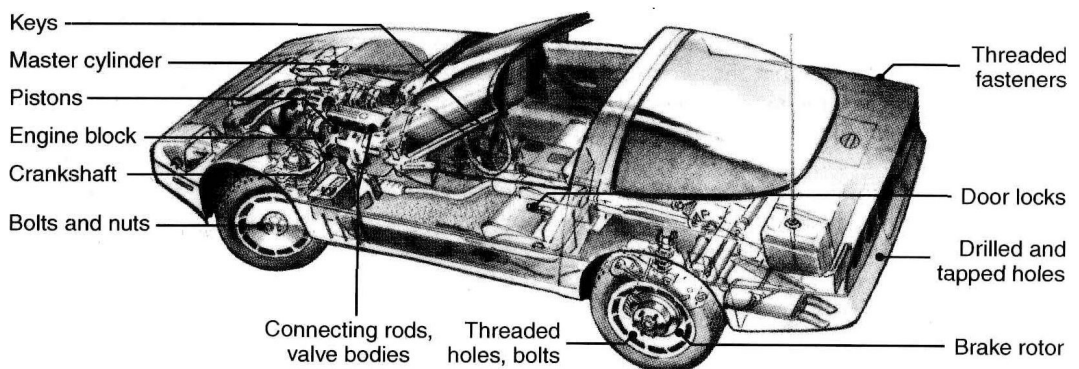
Typical parts on an automobile that require machining operations to impart desirable surface characteristics, dimensions, and tolerances.
